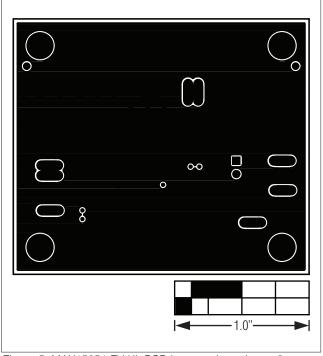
MAX15051 EV Kit PCB Layout—Inner Layer 3
